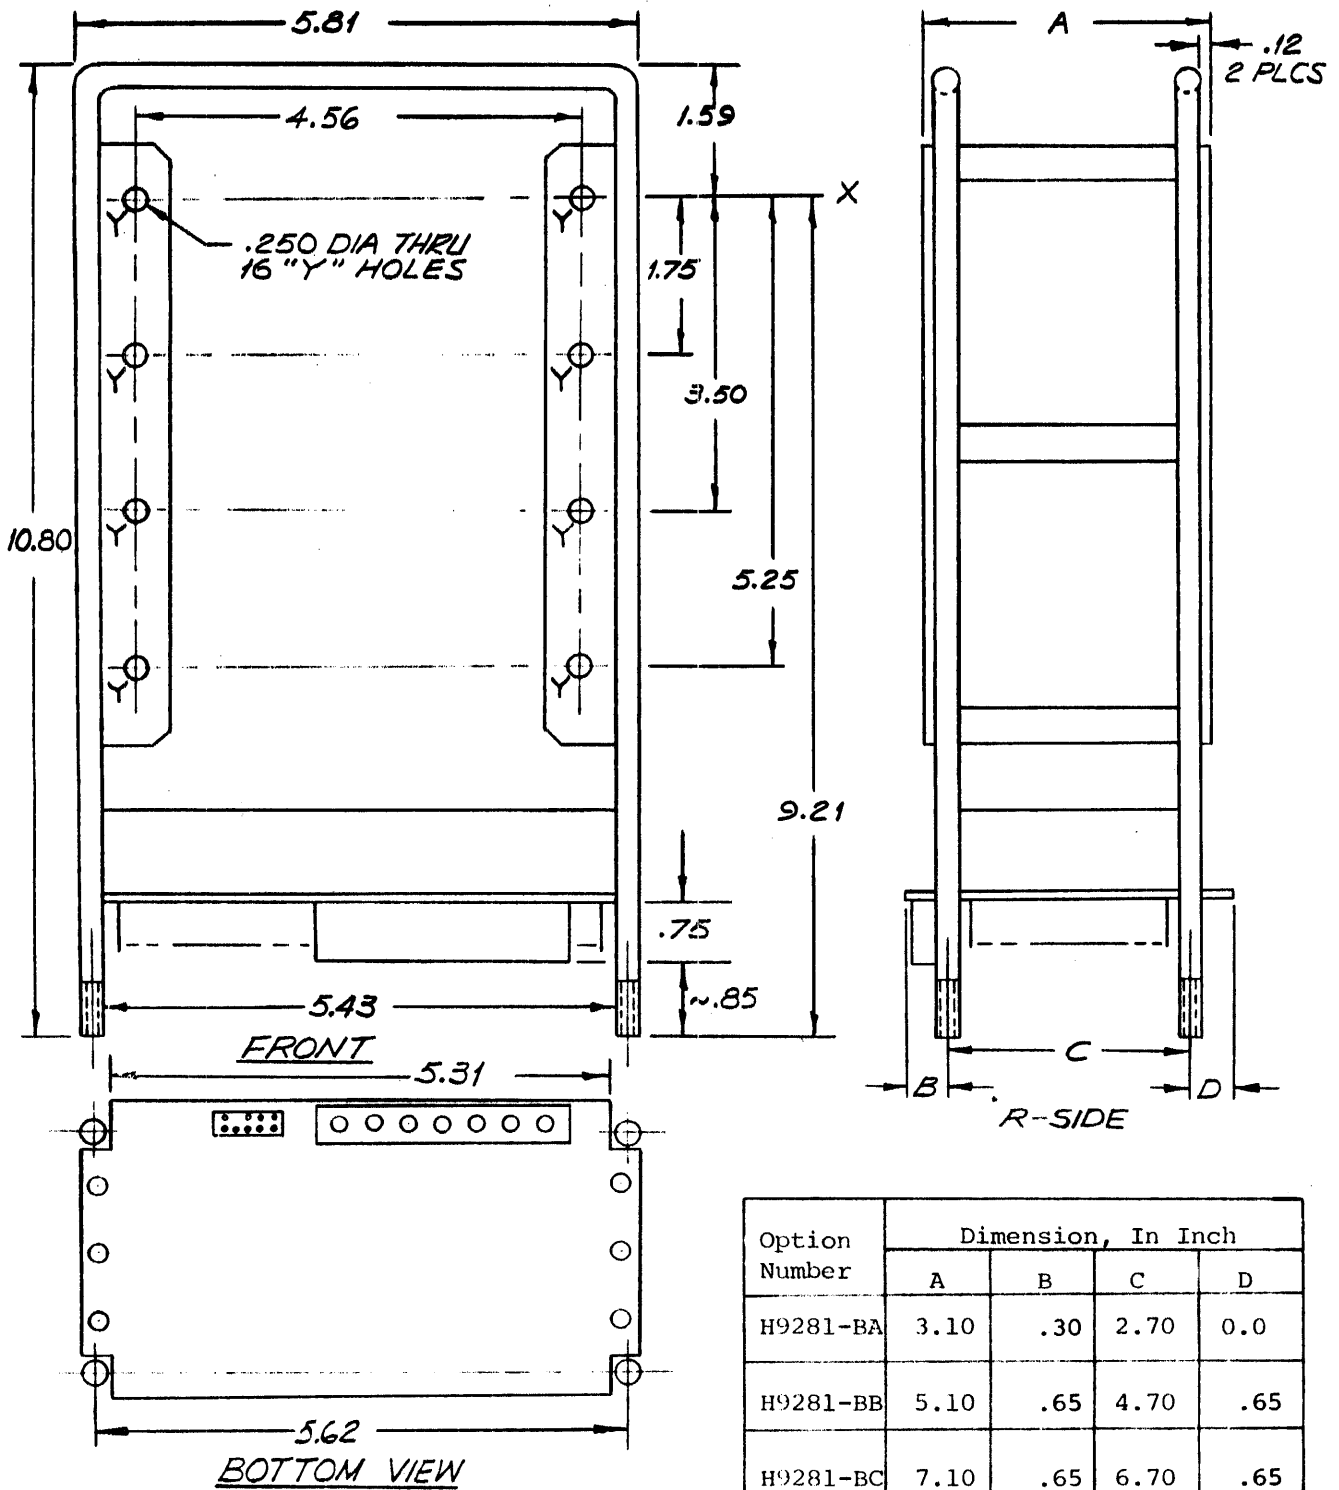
Card-Frame-Assembly Mechanical Drawings (Not To Scale)
